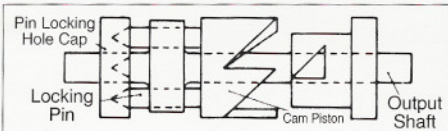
shows the starting position with the lock pins settled in the hole cap.
